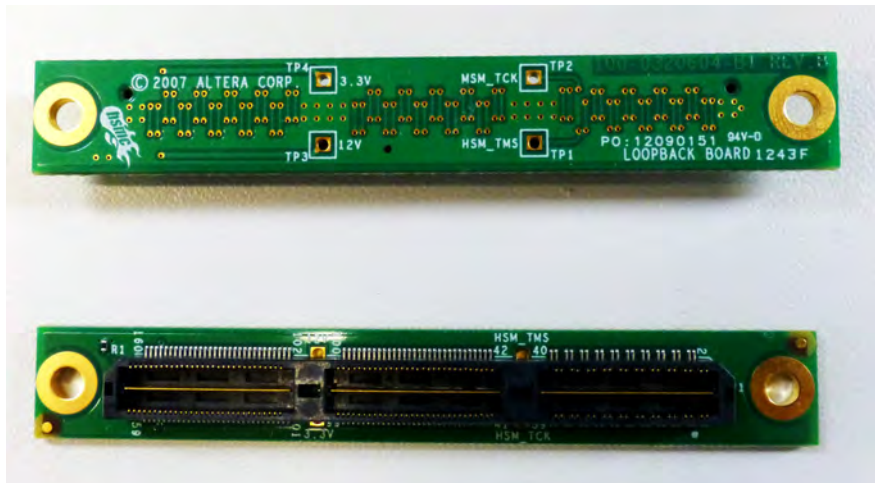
The Altera HSMC loopback board, front side and back side view.
